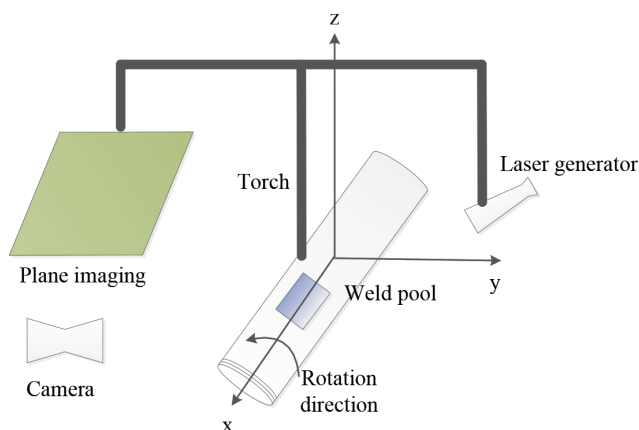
Monitoring System for Three Dimensional Weld Pool Surface Reconstruction.
